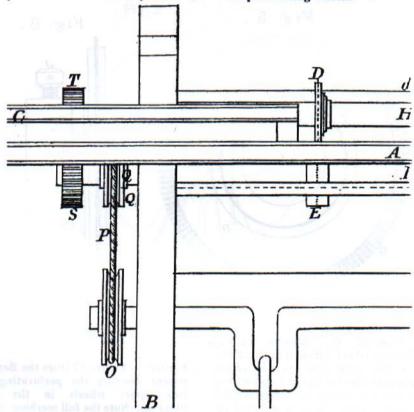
Expanded view of the gears S and T through which the counterpart wheel shaft (driven from the treadle) drives that of the perforating wheels.
